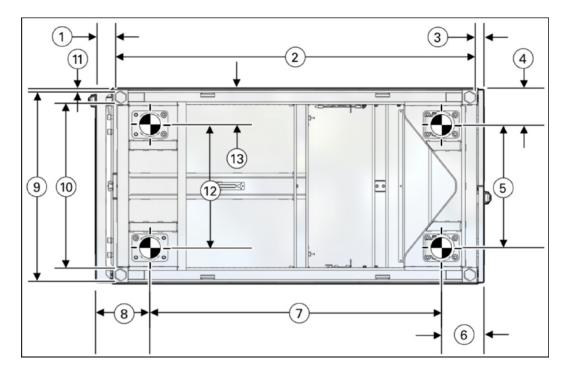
Location of Leveling Feet on ZDLRA Rack X7 or later
